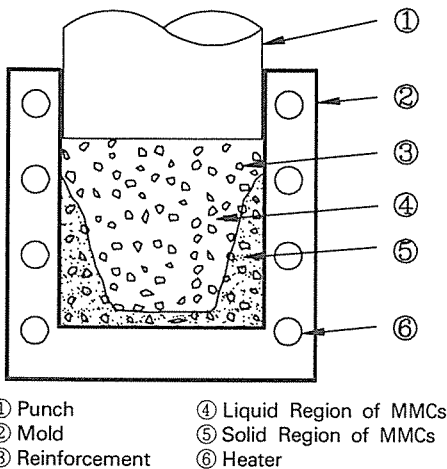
Schematic illustration of solidification state for manufacturing MMCs billets by squeeze casting
